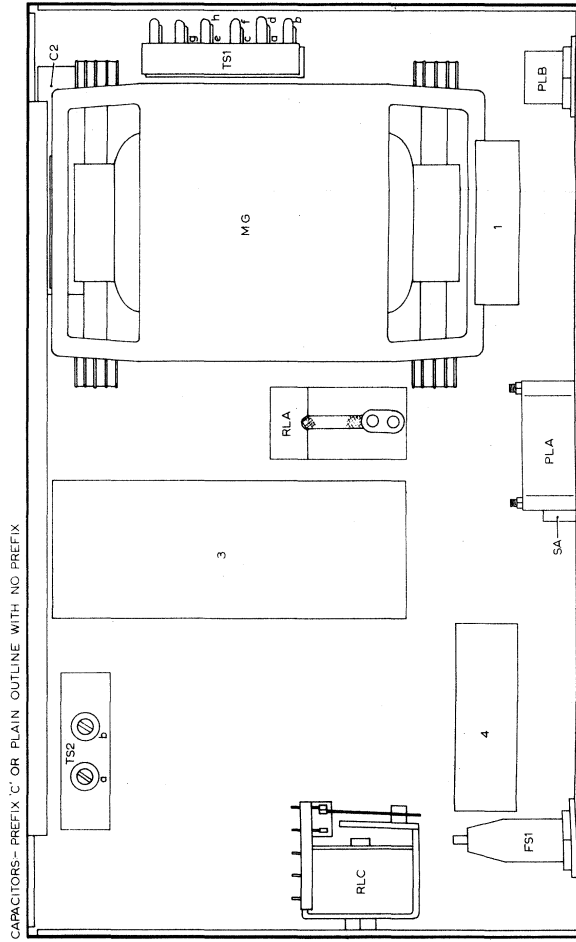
TRANSMITTER CHASSIS LAYOUT DIAGRAMS
